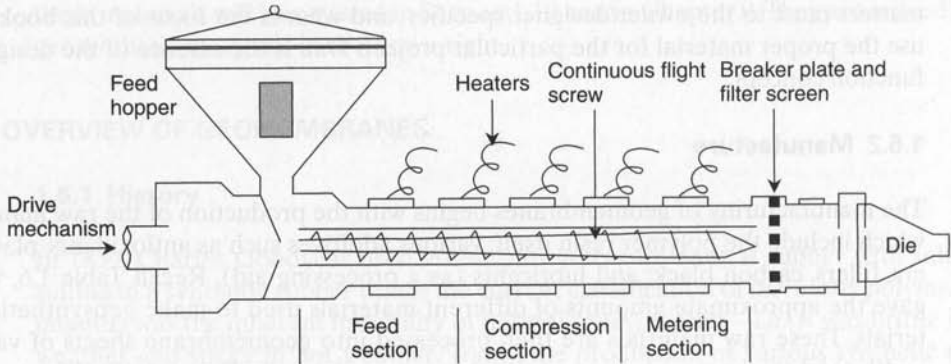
Cross-section diagram of a horizontal single-screw extruder for polymer processing.
